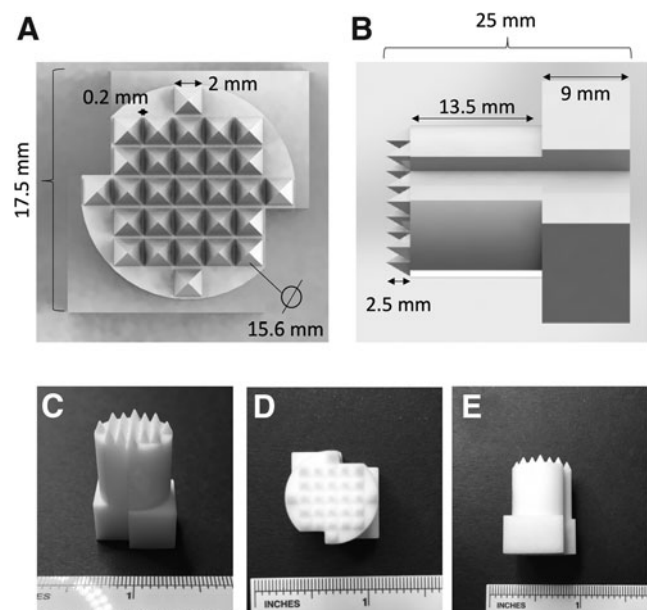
Stamp design and macroscopic appearance. (A) Top view and (B) side view of the designed .stl file. (C) Macroscopic appearance of the 3D printed stamp prototypes formed from a urethane methacrylate resin, (D) top view and (E) side view. 3D, three-dimensional.
